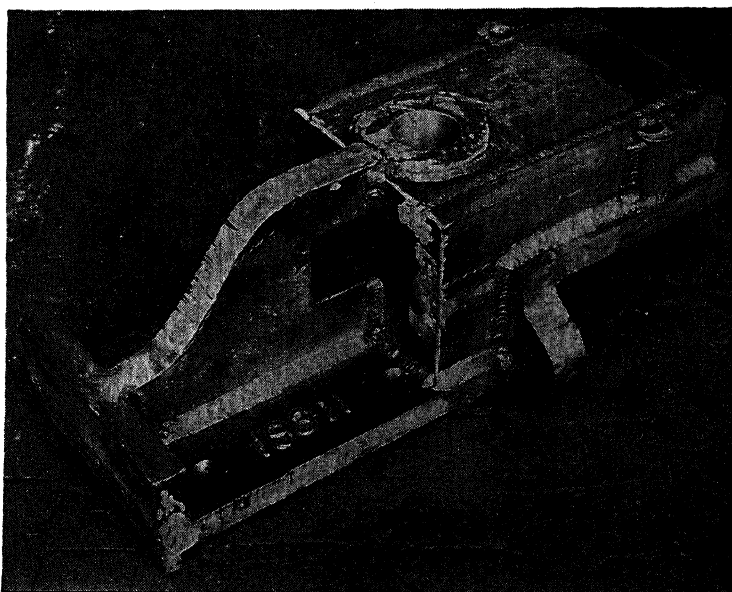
Fabricated draw head of mining locomotive. Replaces broken casting. Built in 16 hours at cost of \$30.00. Saved delay of one week.
